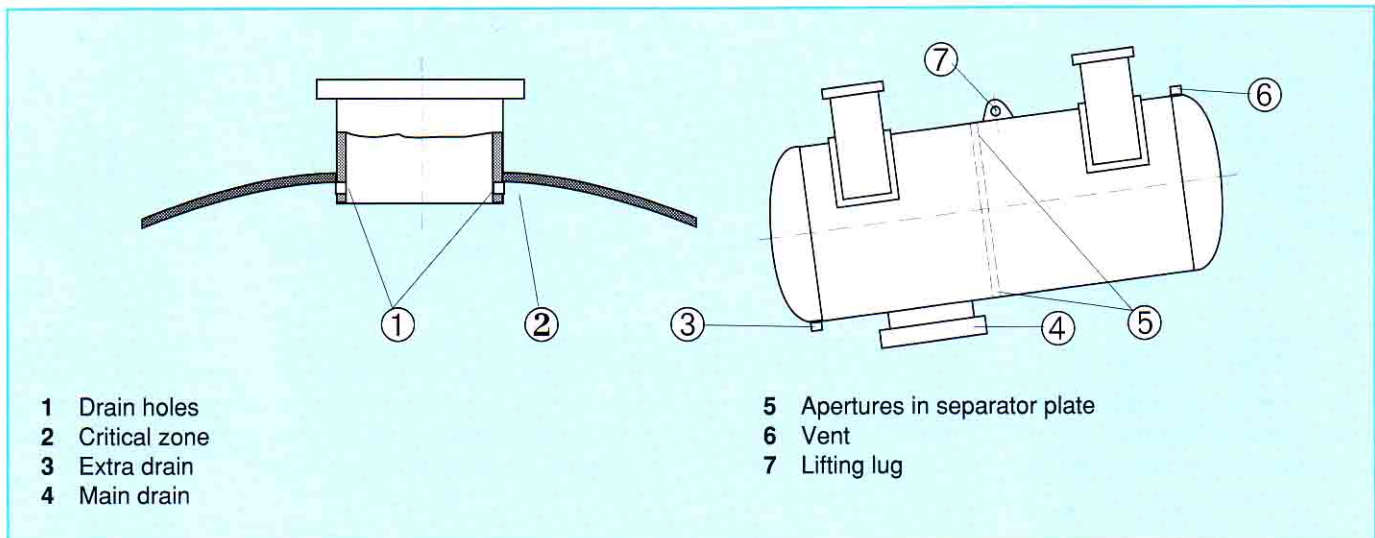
Additional features for galvanizing a cylindrical fluid tank in a bath
